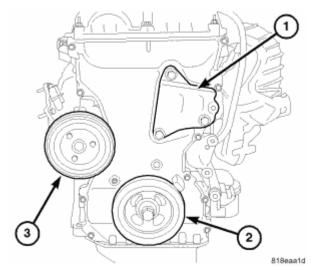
RIGHT ENGINE MOUNT BRACKET Courtesy of CHRYSLER LLC
